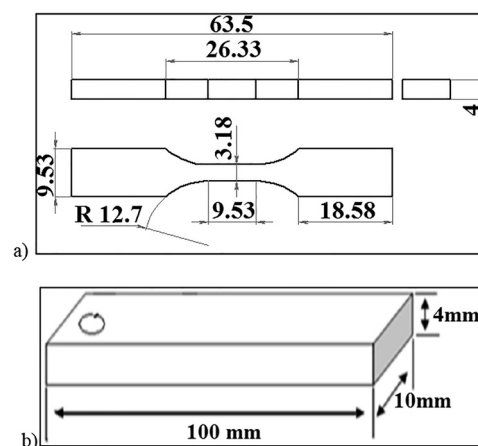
a) The dimension of the printed specimen according to ASTM-D638-V; b) the dimension of the printed fatigue specimen
